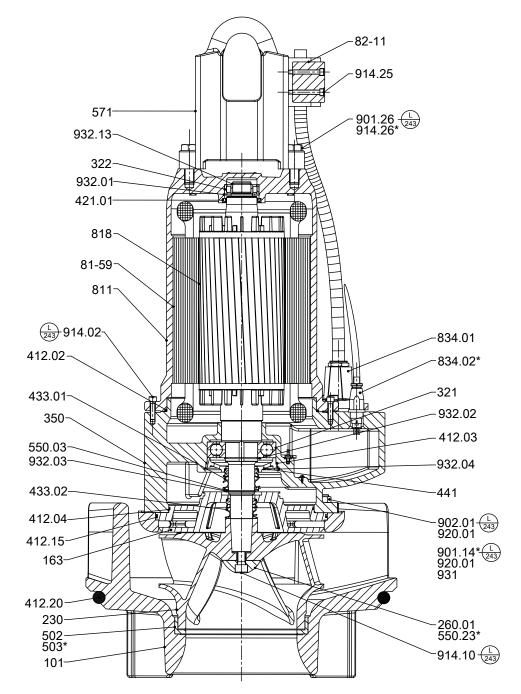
General assembly drawing, motor versions UE, XE, YE
